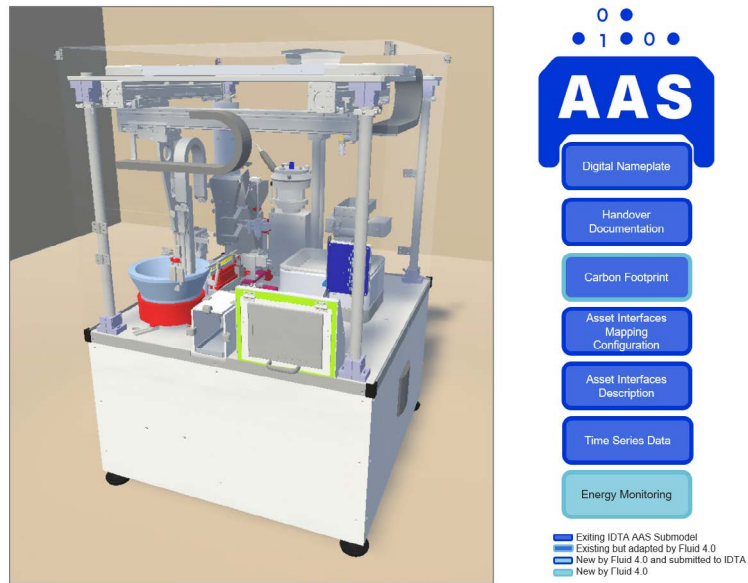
Ballpoint pen assembly machine and AAS submodels used
